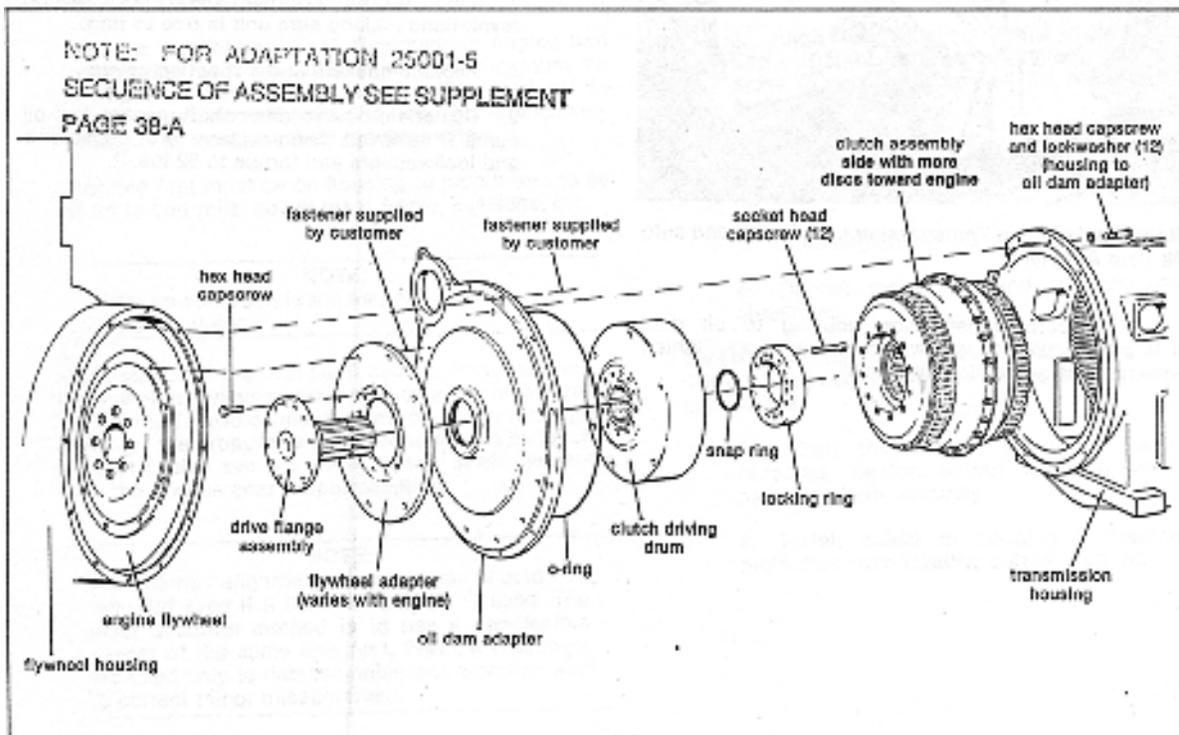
Sequence of Assembly: Adapter Parts, Clutch and Housing.
